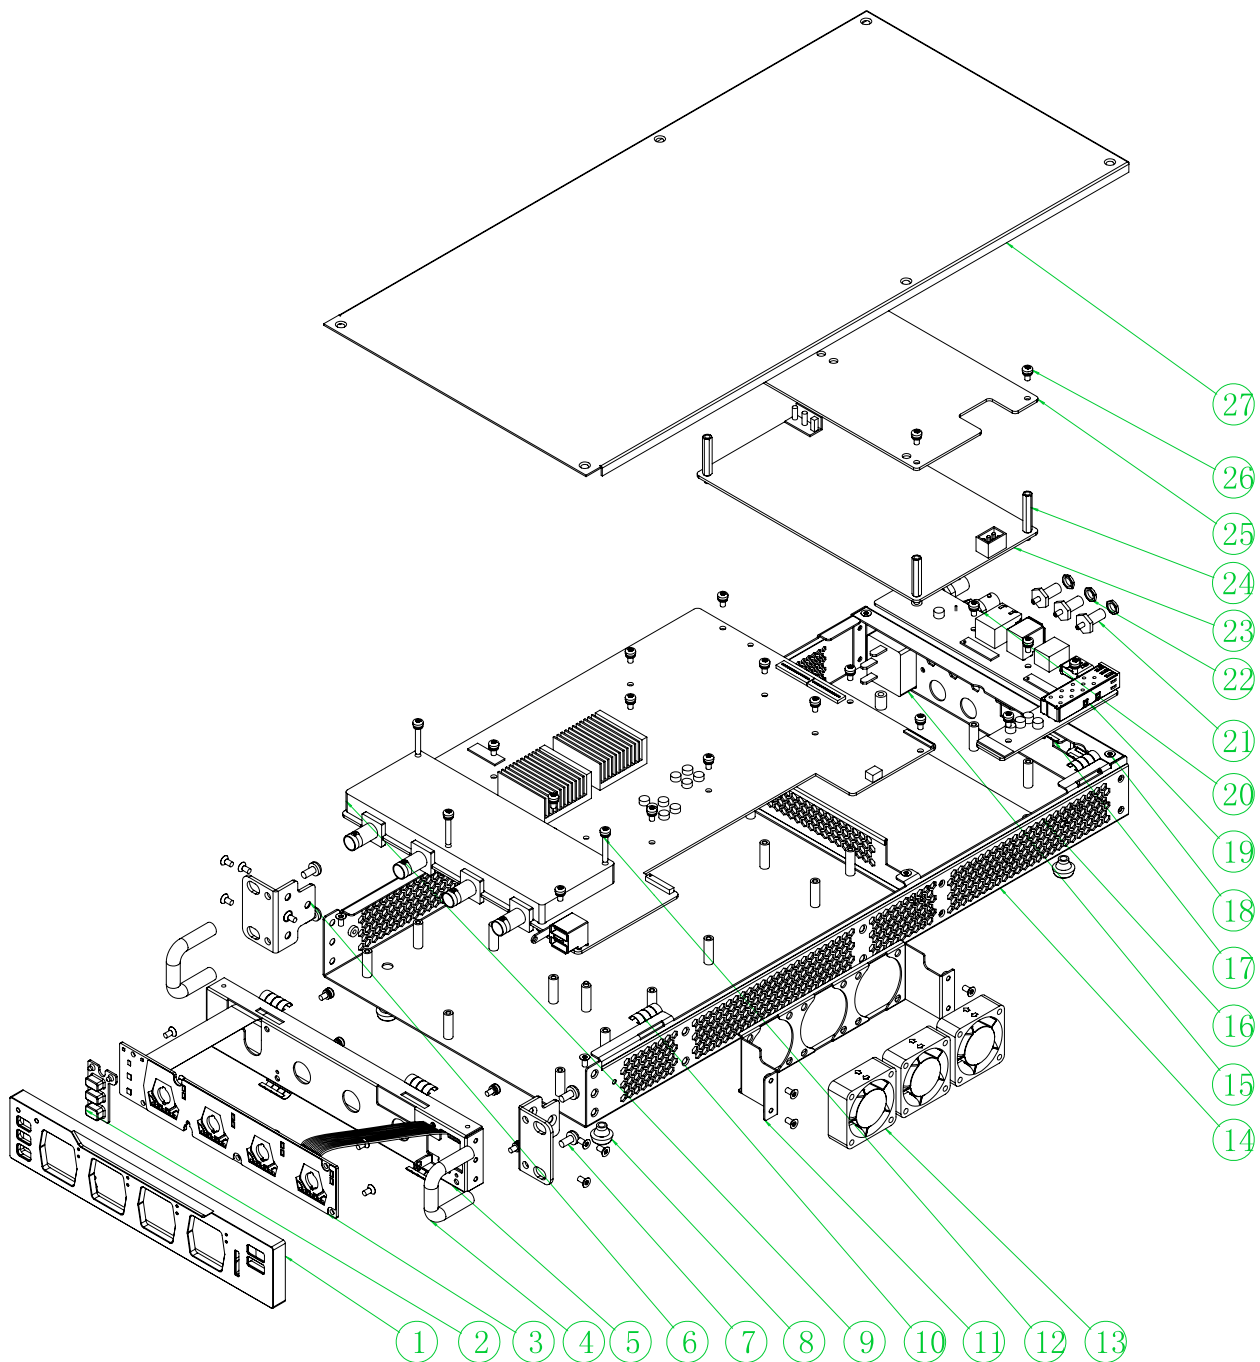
Exploded View Drawing of DS8000-R (Installed with the Function/AWG Option)
